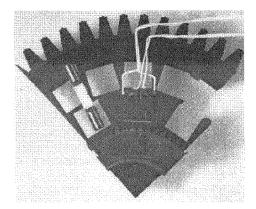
Tensile and compact tension specimens machined from the Nene X disc. The eletrical leads are part of the automated DC-PD technique used to monitor crack growth during testing.
